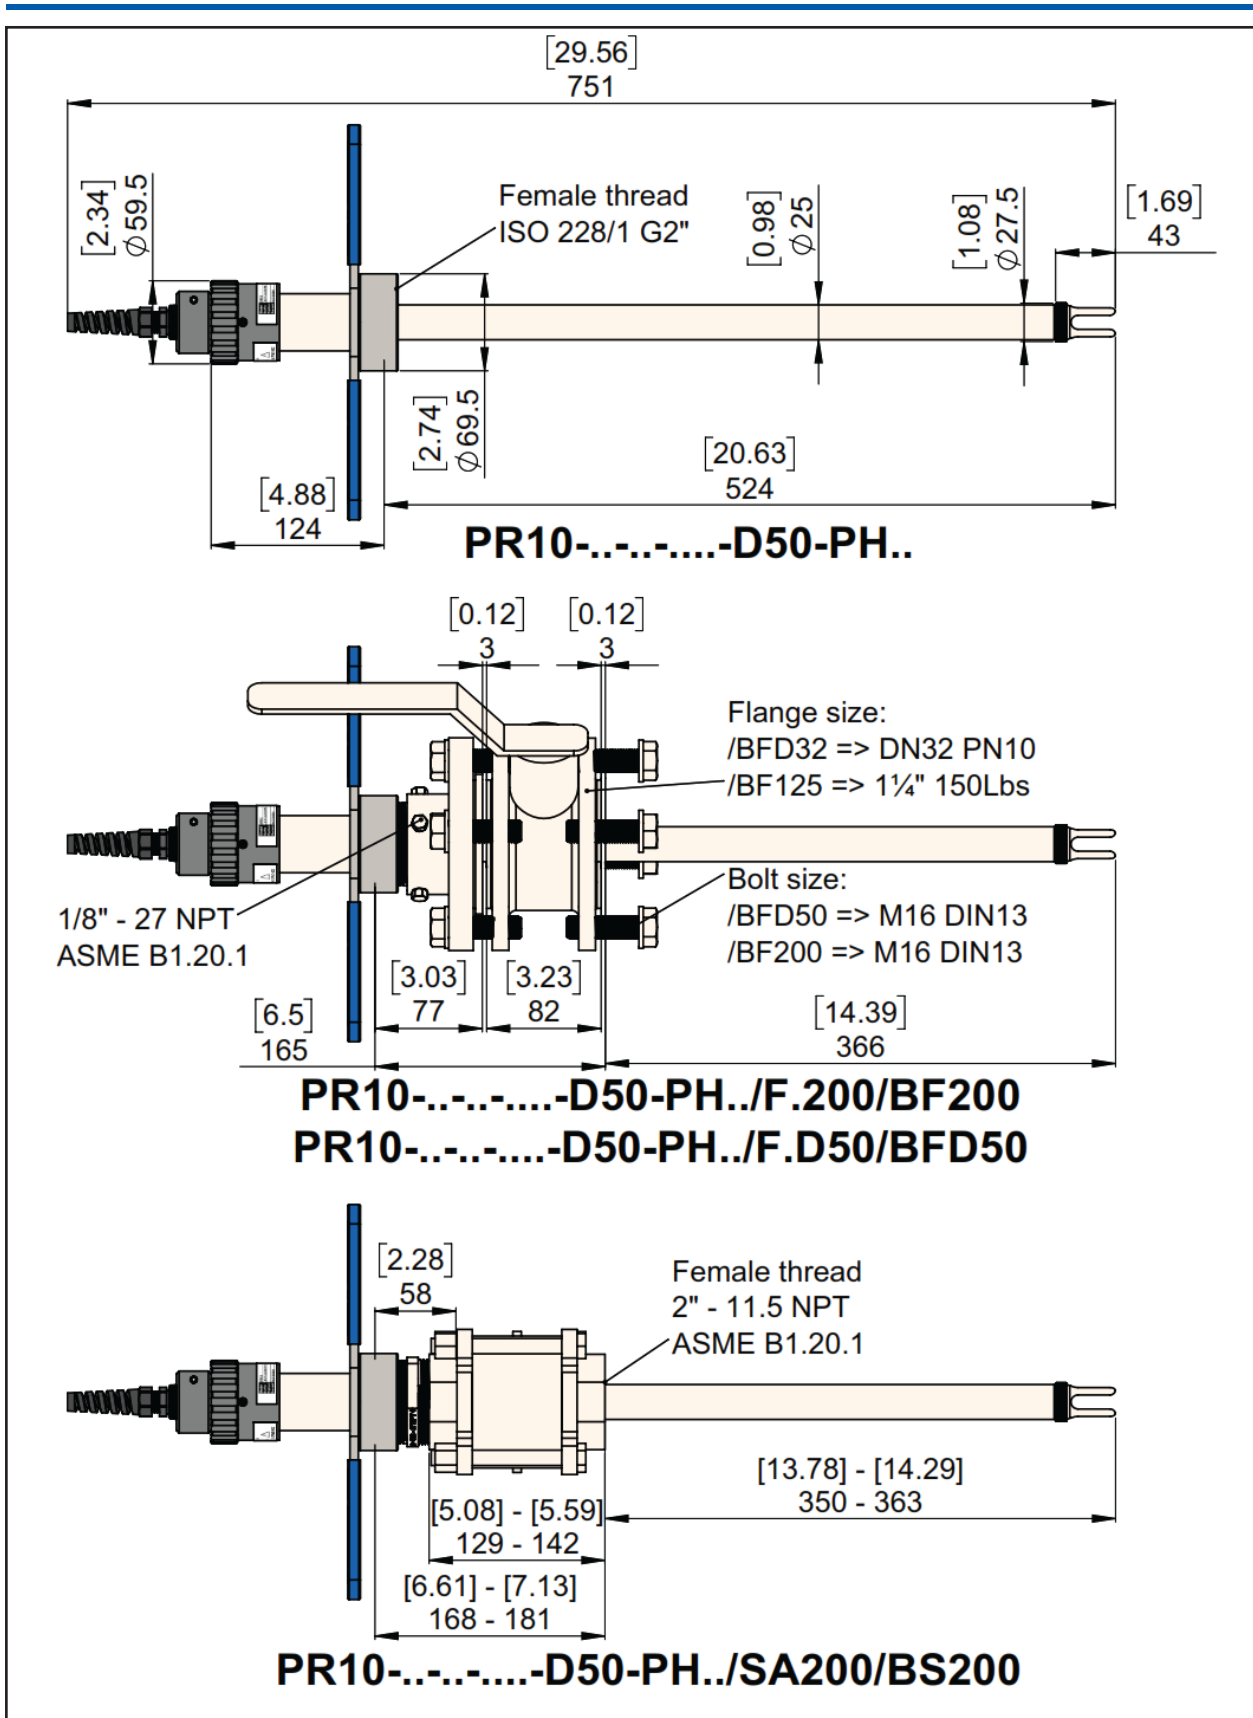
Dimensional drawing PR10...-D50 with mounted pH sensor - units in mm [inch]
